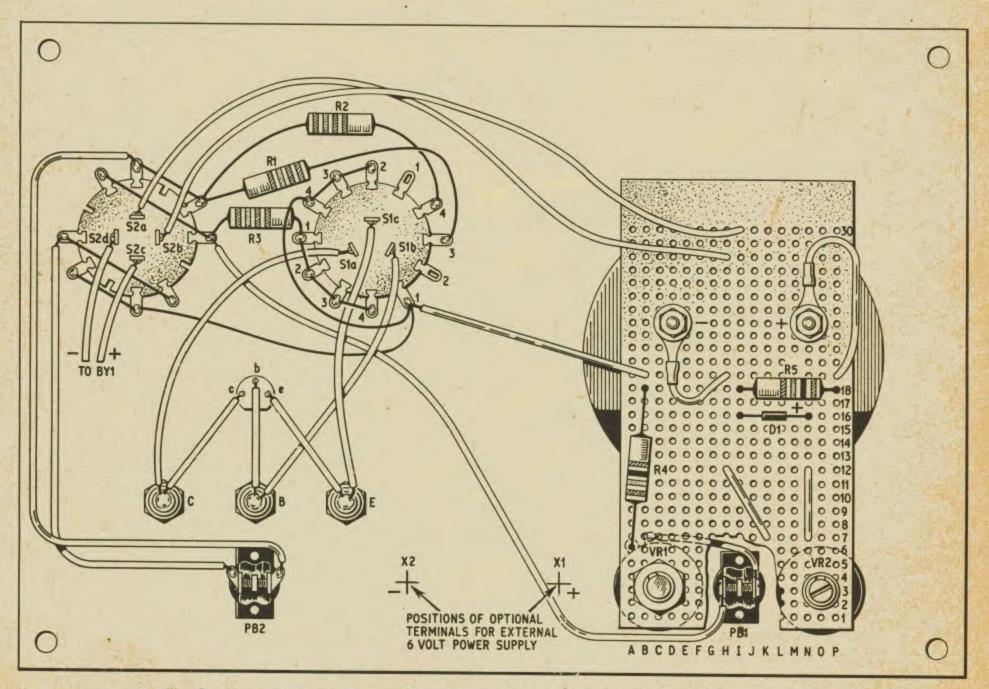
Rear view of the assembled instrument showing the wiring of the front panel
